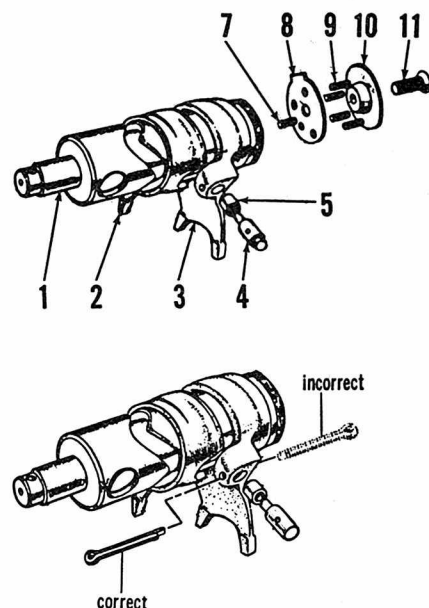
Exploded view of four speed gear shift assembly. Cotter pins in guide pins (4) should be installed from middle of shifter assembly outward.
